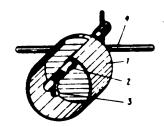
Puller for Removing the Oil Pump from Gearbox
